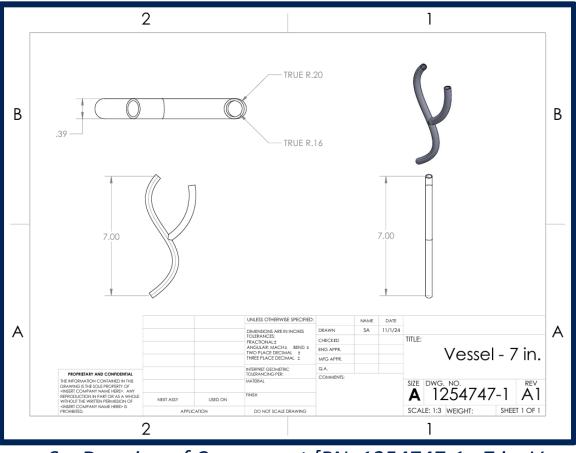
Drawing of Component [PN: 1254747-1_7 in. Vessel]
